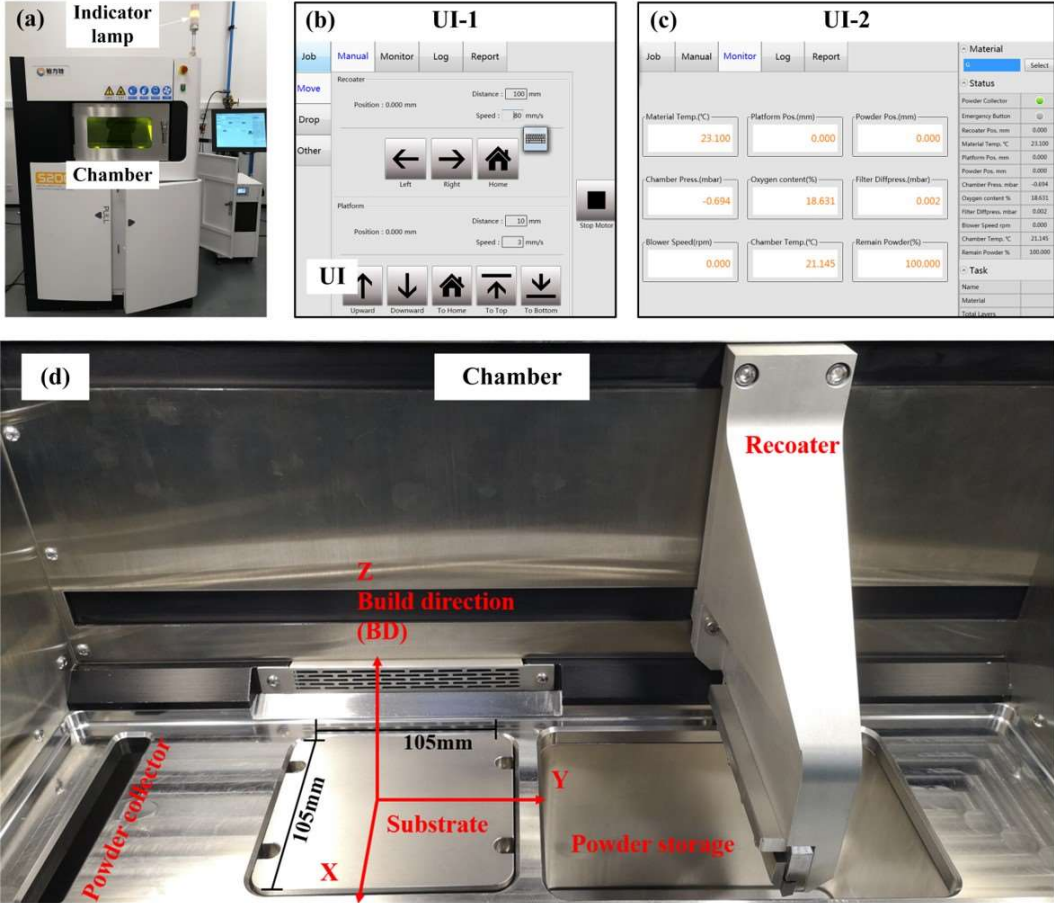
Chamber and user interface (UI) of LPBF machine. (a) BLT S200; (b) UI-1 motors motion manual; (c) UI-2 machine condition monitor; (d) chamber for printing.
